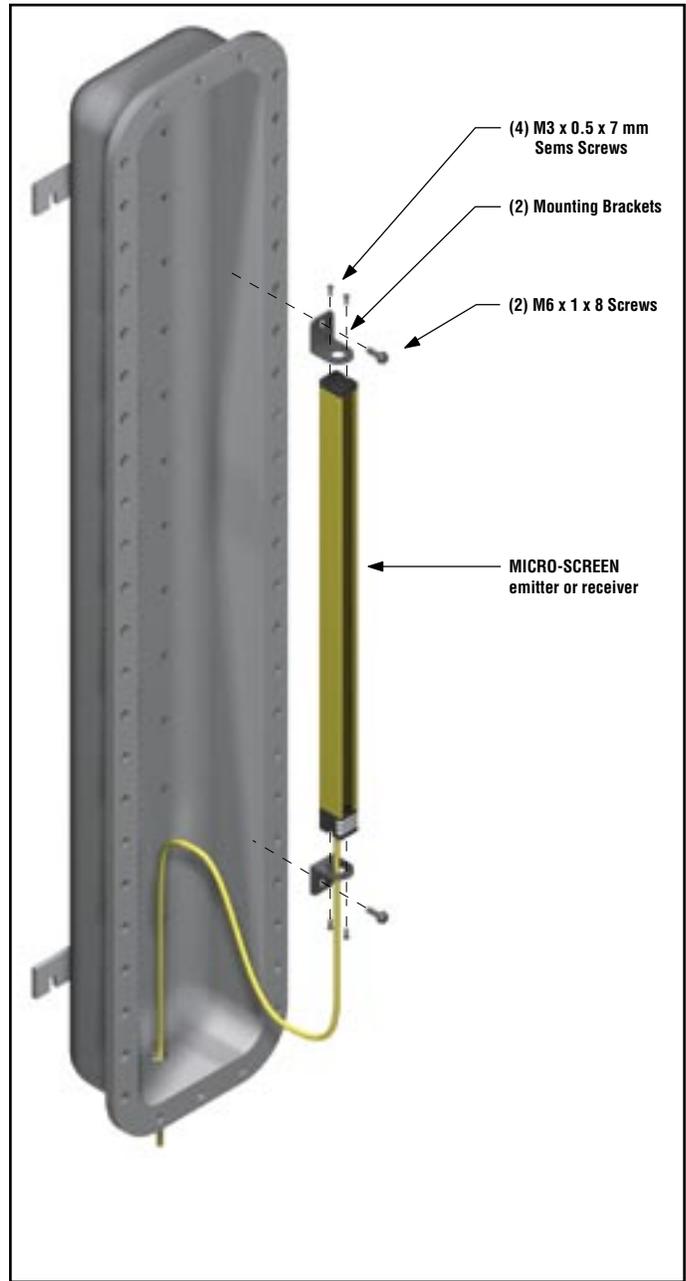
Model US-XPE-43 housing with sensor mounting hardware
